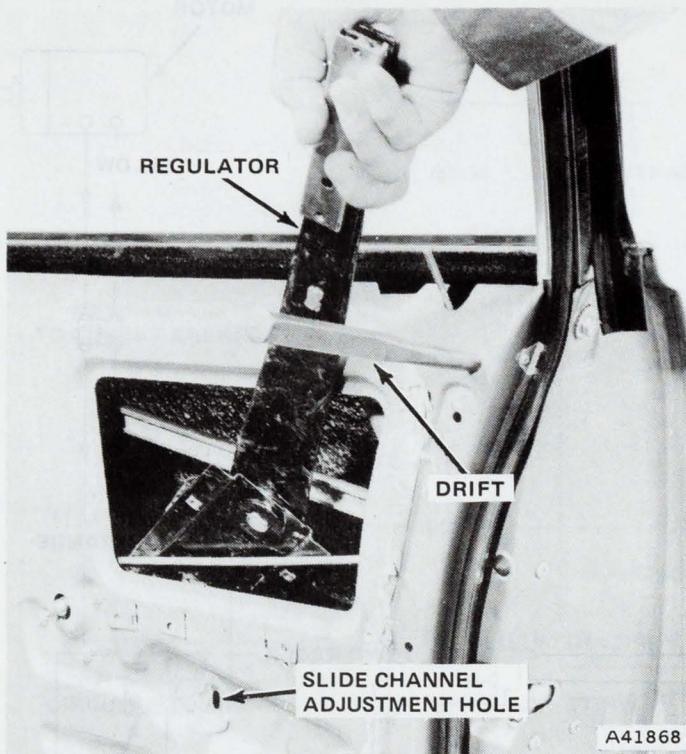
J-75 Front Door Window Regulator Assembly Removal
